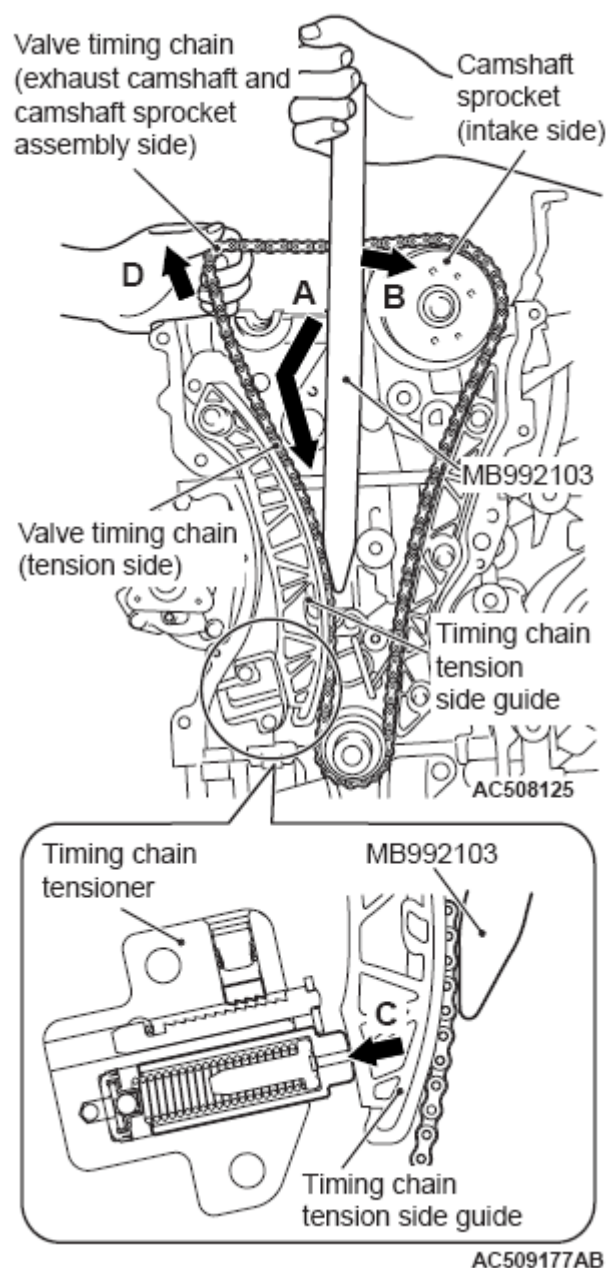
Preparing For Camshaft And Camshaft Sprocket Installation
